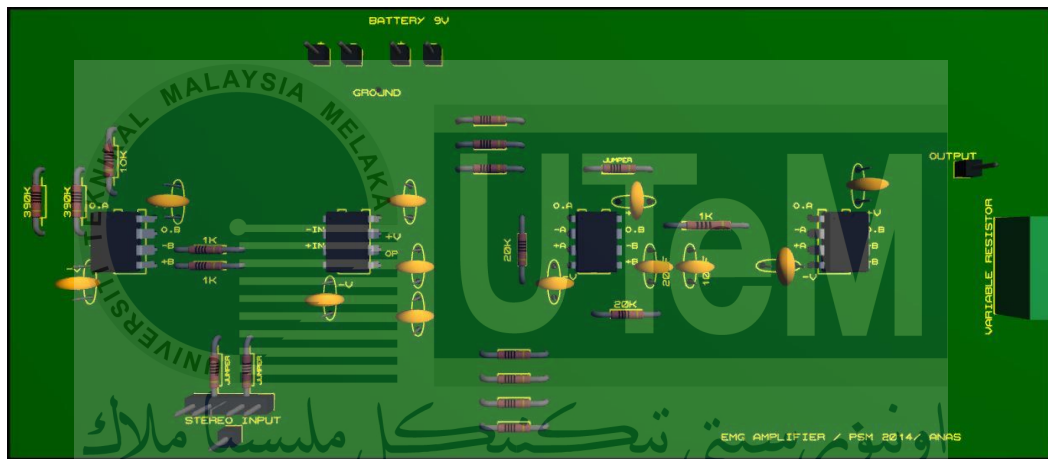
3D Visualization of the real life layout style shows the PCB with its components
